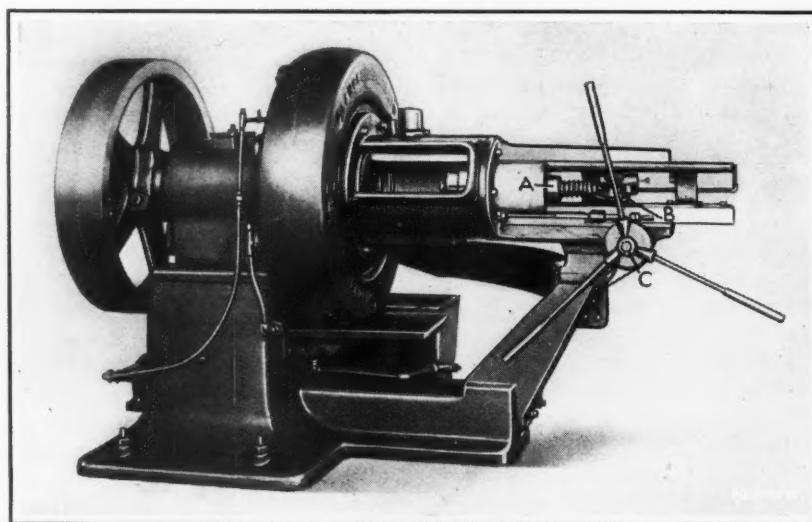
Swaging Machine with Hand Feed and Compressed Air Work-holder
